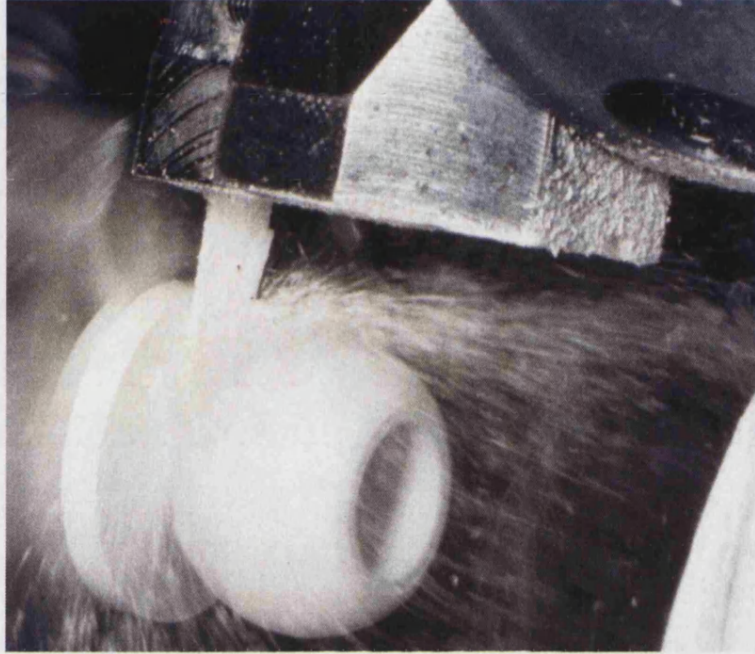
Fixed grit diamond machining of alumina ceramic ball heads [29].
